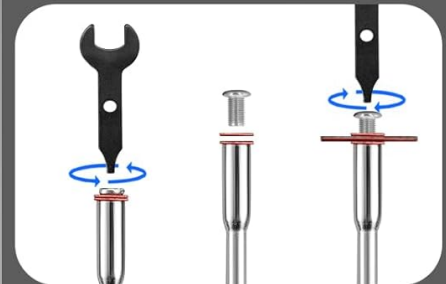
Visual guide for attaching accessories: pressing the lock button, loosening the collet nut with a wrench, inserting the accessory, and tightening the collet nut.
